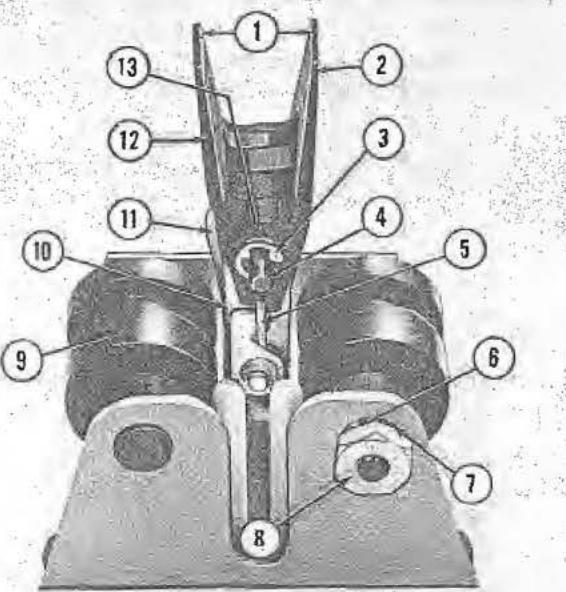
BRACKET AND ROLLER ASSEMBLY, LIFT ARM GUIDE, 2400
